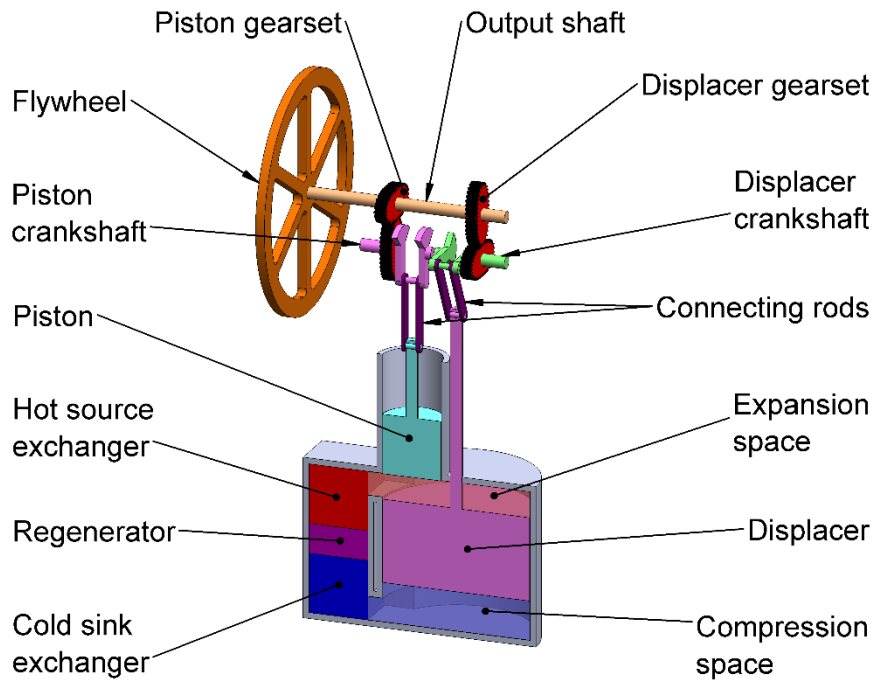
Conceptual embodiment of a gamma Stirling engine with a drive mechanism using non-circular gears
